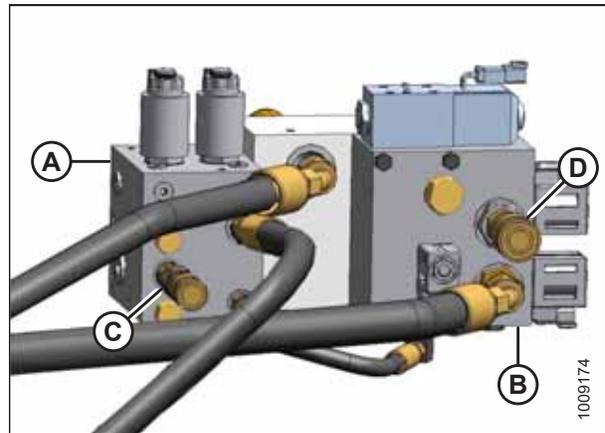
Manifolds with Reverser Valve Configured for Auger Header
